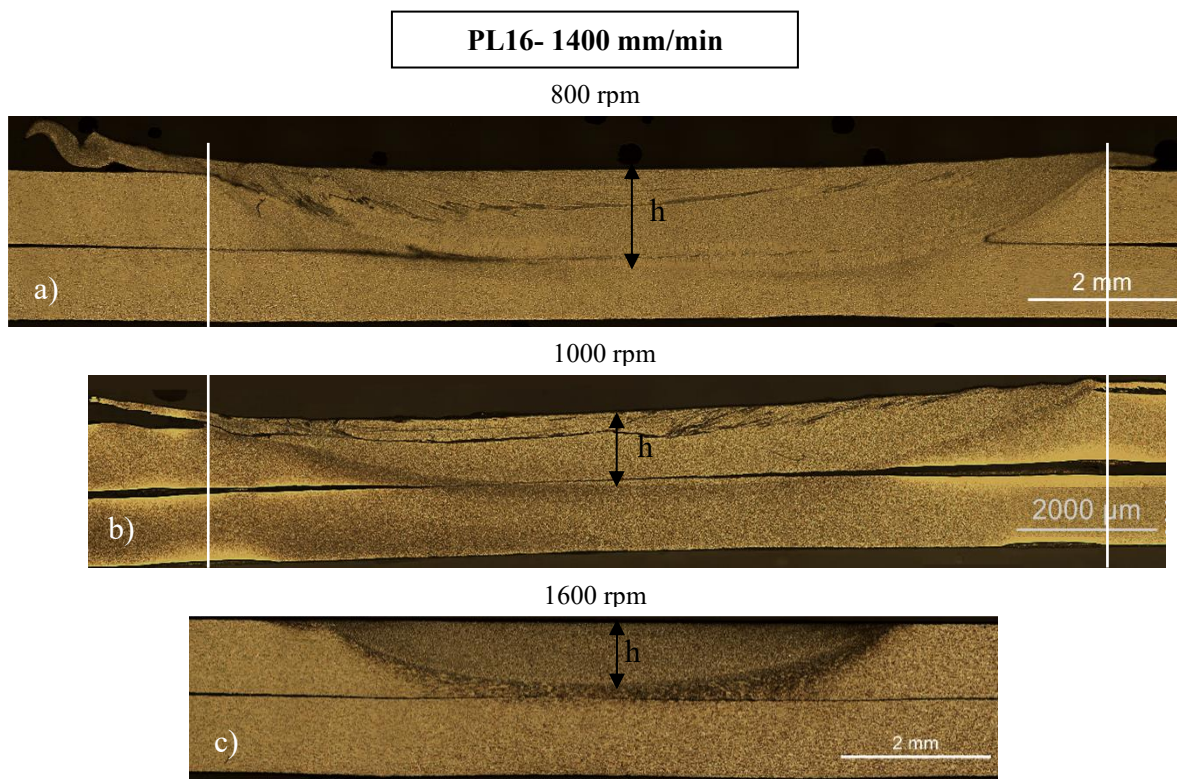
Cross-sections of the welds manufactured with PL16 tool, 1400 mm/min and varying the rotational speed.
